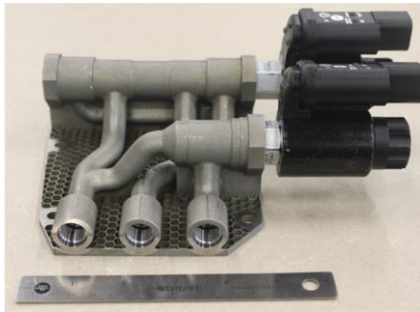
Hydraulic manifold redesigned and fabricated using L-PBF of stainless steel [26] (CIMP-3D and NAVAIR Lakehurst).
